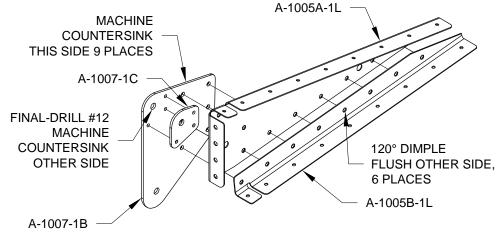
MACHINE COUNTERSINK MAIN RIBS AND HINGE BRACKETS
